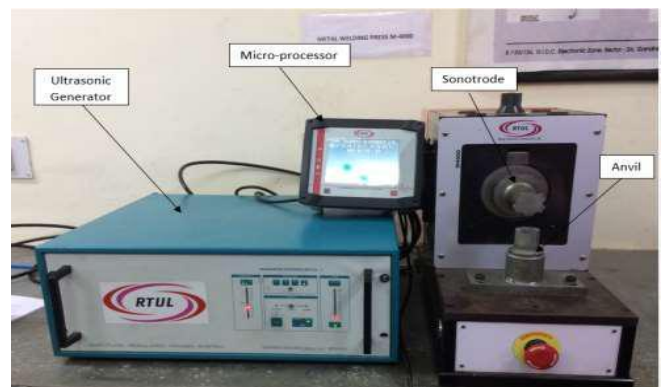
Ultrasonic Welding Experimental Set-up
